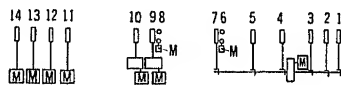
20 IN.-16 IN. STRIP MILL AT ACME STEEL COMPANY
